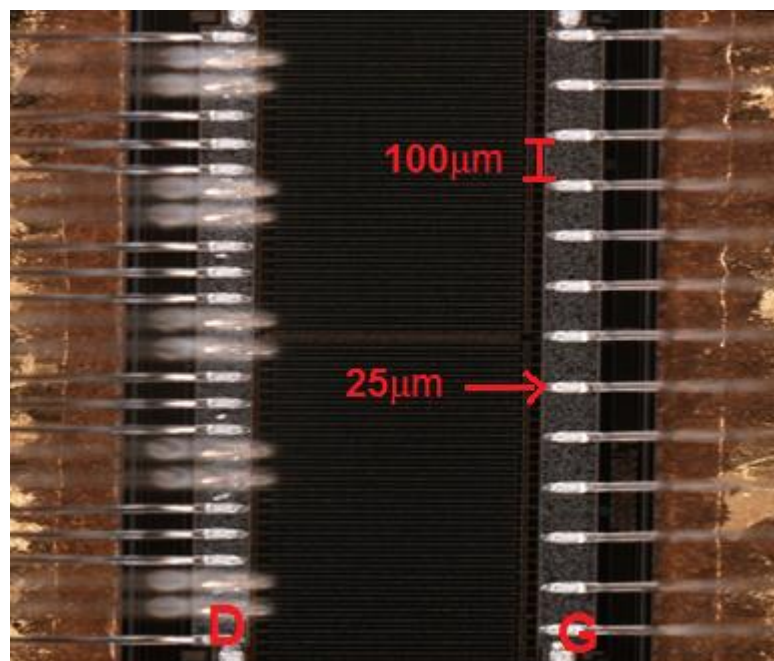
A magnified image of a section of generic high power transistor, with ceramic casing removed, highlighting the dimensions of the componentry.
